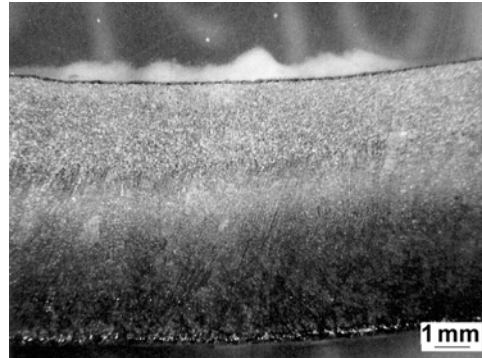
Optical macrograph of a tube cross-section obtained from sample No. 1 showing the carburised region
